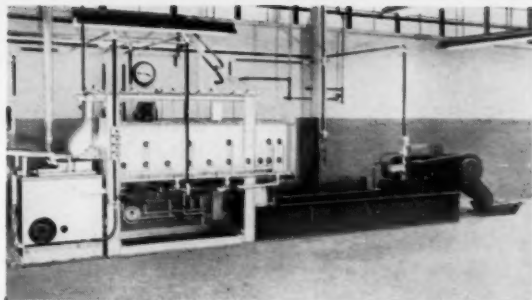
A modern reciprocating hearth heating machine installed with continuous automatic quenching tank at the plant of the Crouse-Hinds Company, heat treating electrical connection fittings in a controlled atmosphere. This machine produces up to approximately 250 pounds per hour.
